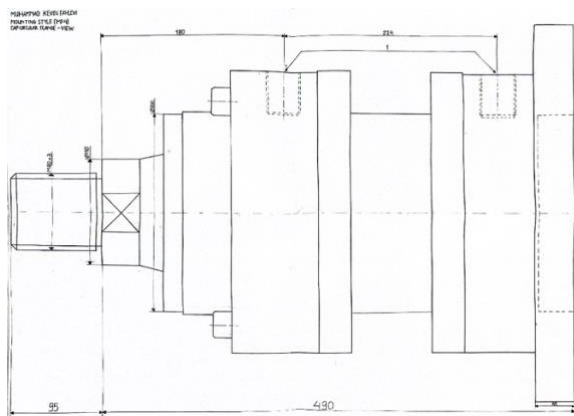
Constructed Drawing of the MF4 Hydraulic Cylinder in the view perspective
